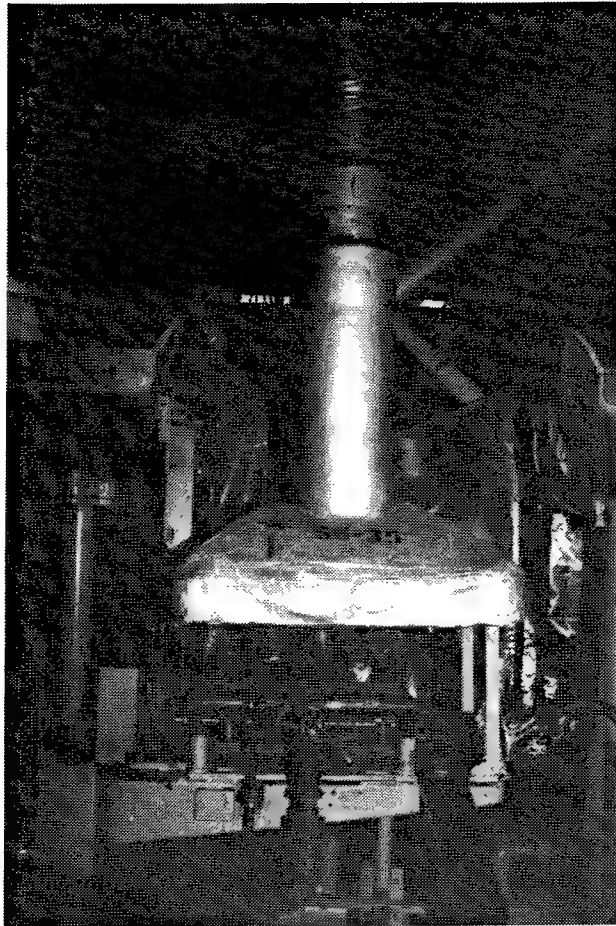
Building 4: Case Mouth and Neck Anneal Machine manufactured by Jennings Machine Co.
